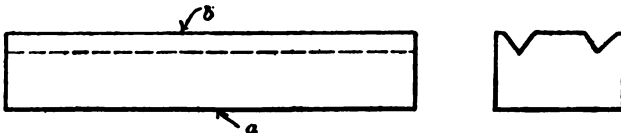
Casting to be Milled in Fixture shown in Fig. 28
